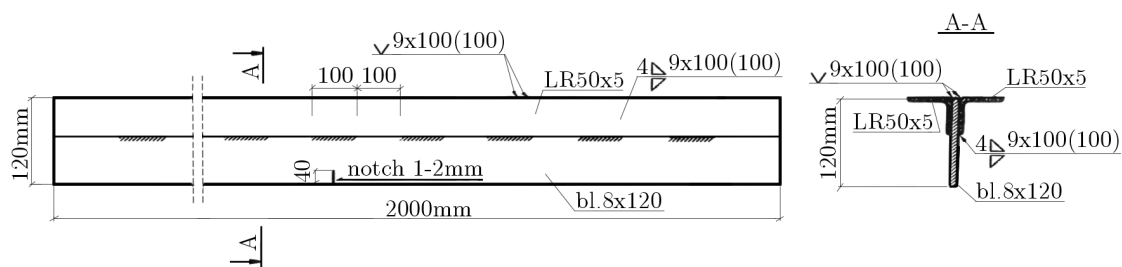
Scheme drawing of welded beams 120 mm in height
